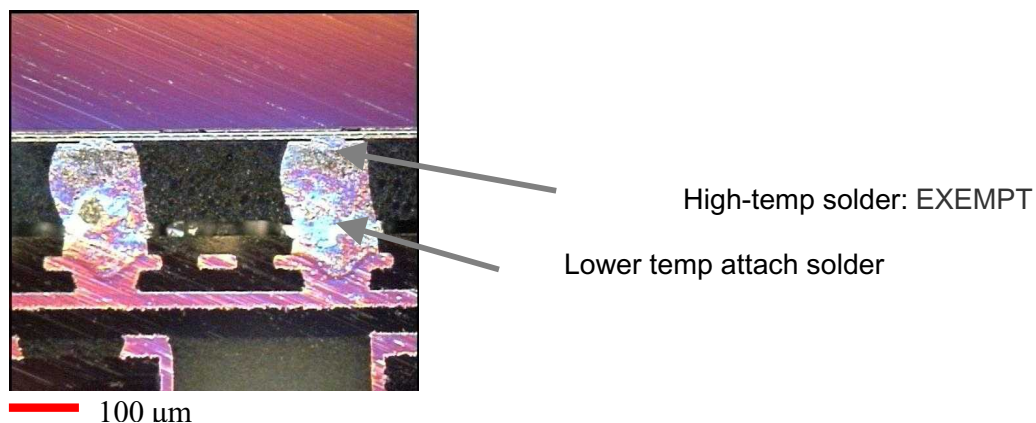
SEM Image of Internal Solder Joint (high and lower temperature solders)
